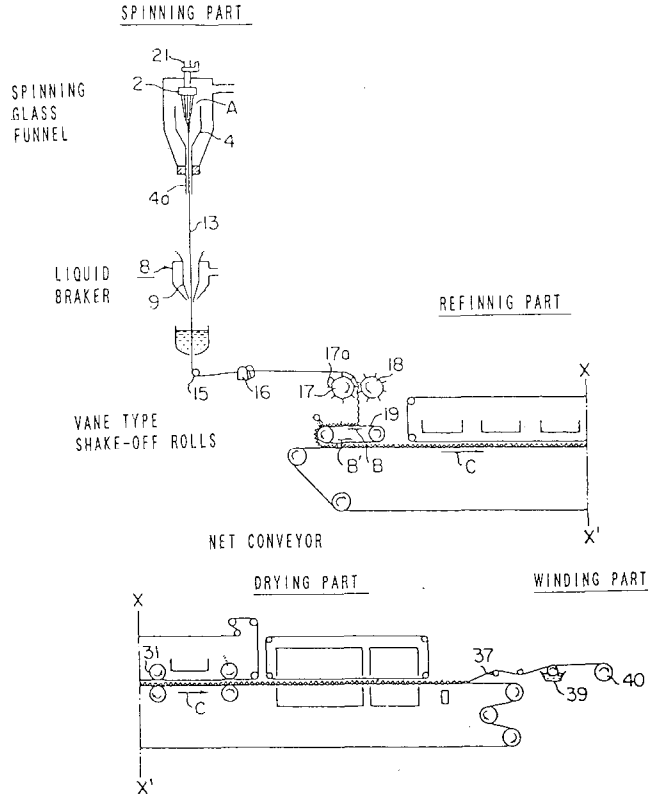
The process of high-speed spinning machine of Bemberg (380 m/min)
